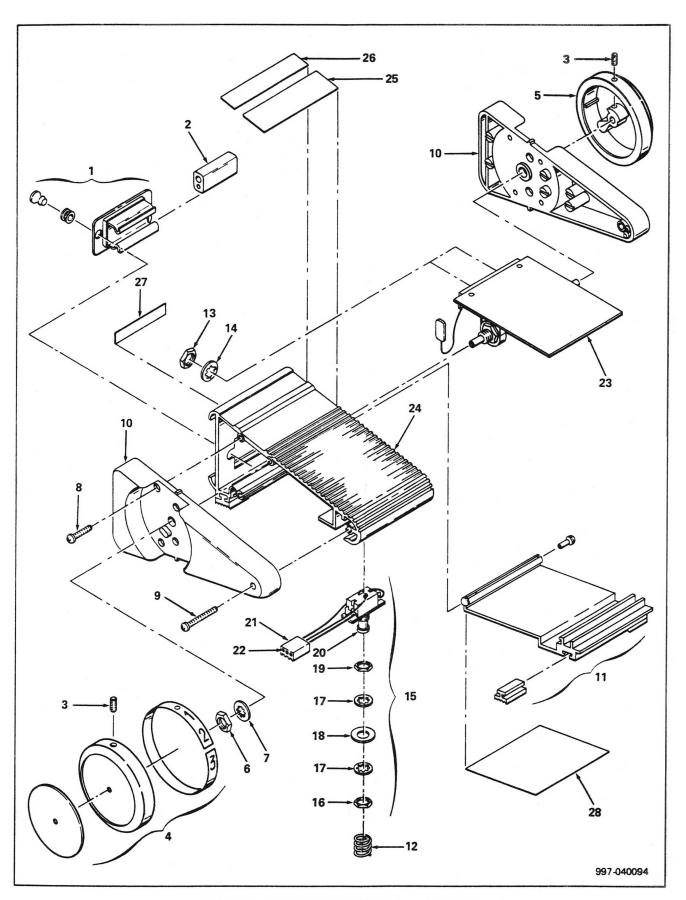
MAESTRO PHASER EXPLODED VIEW
